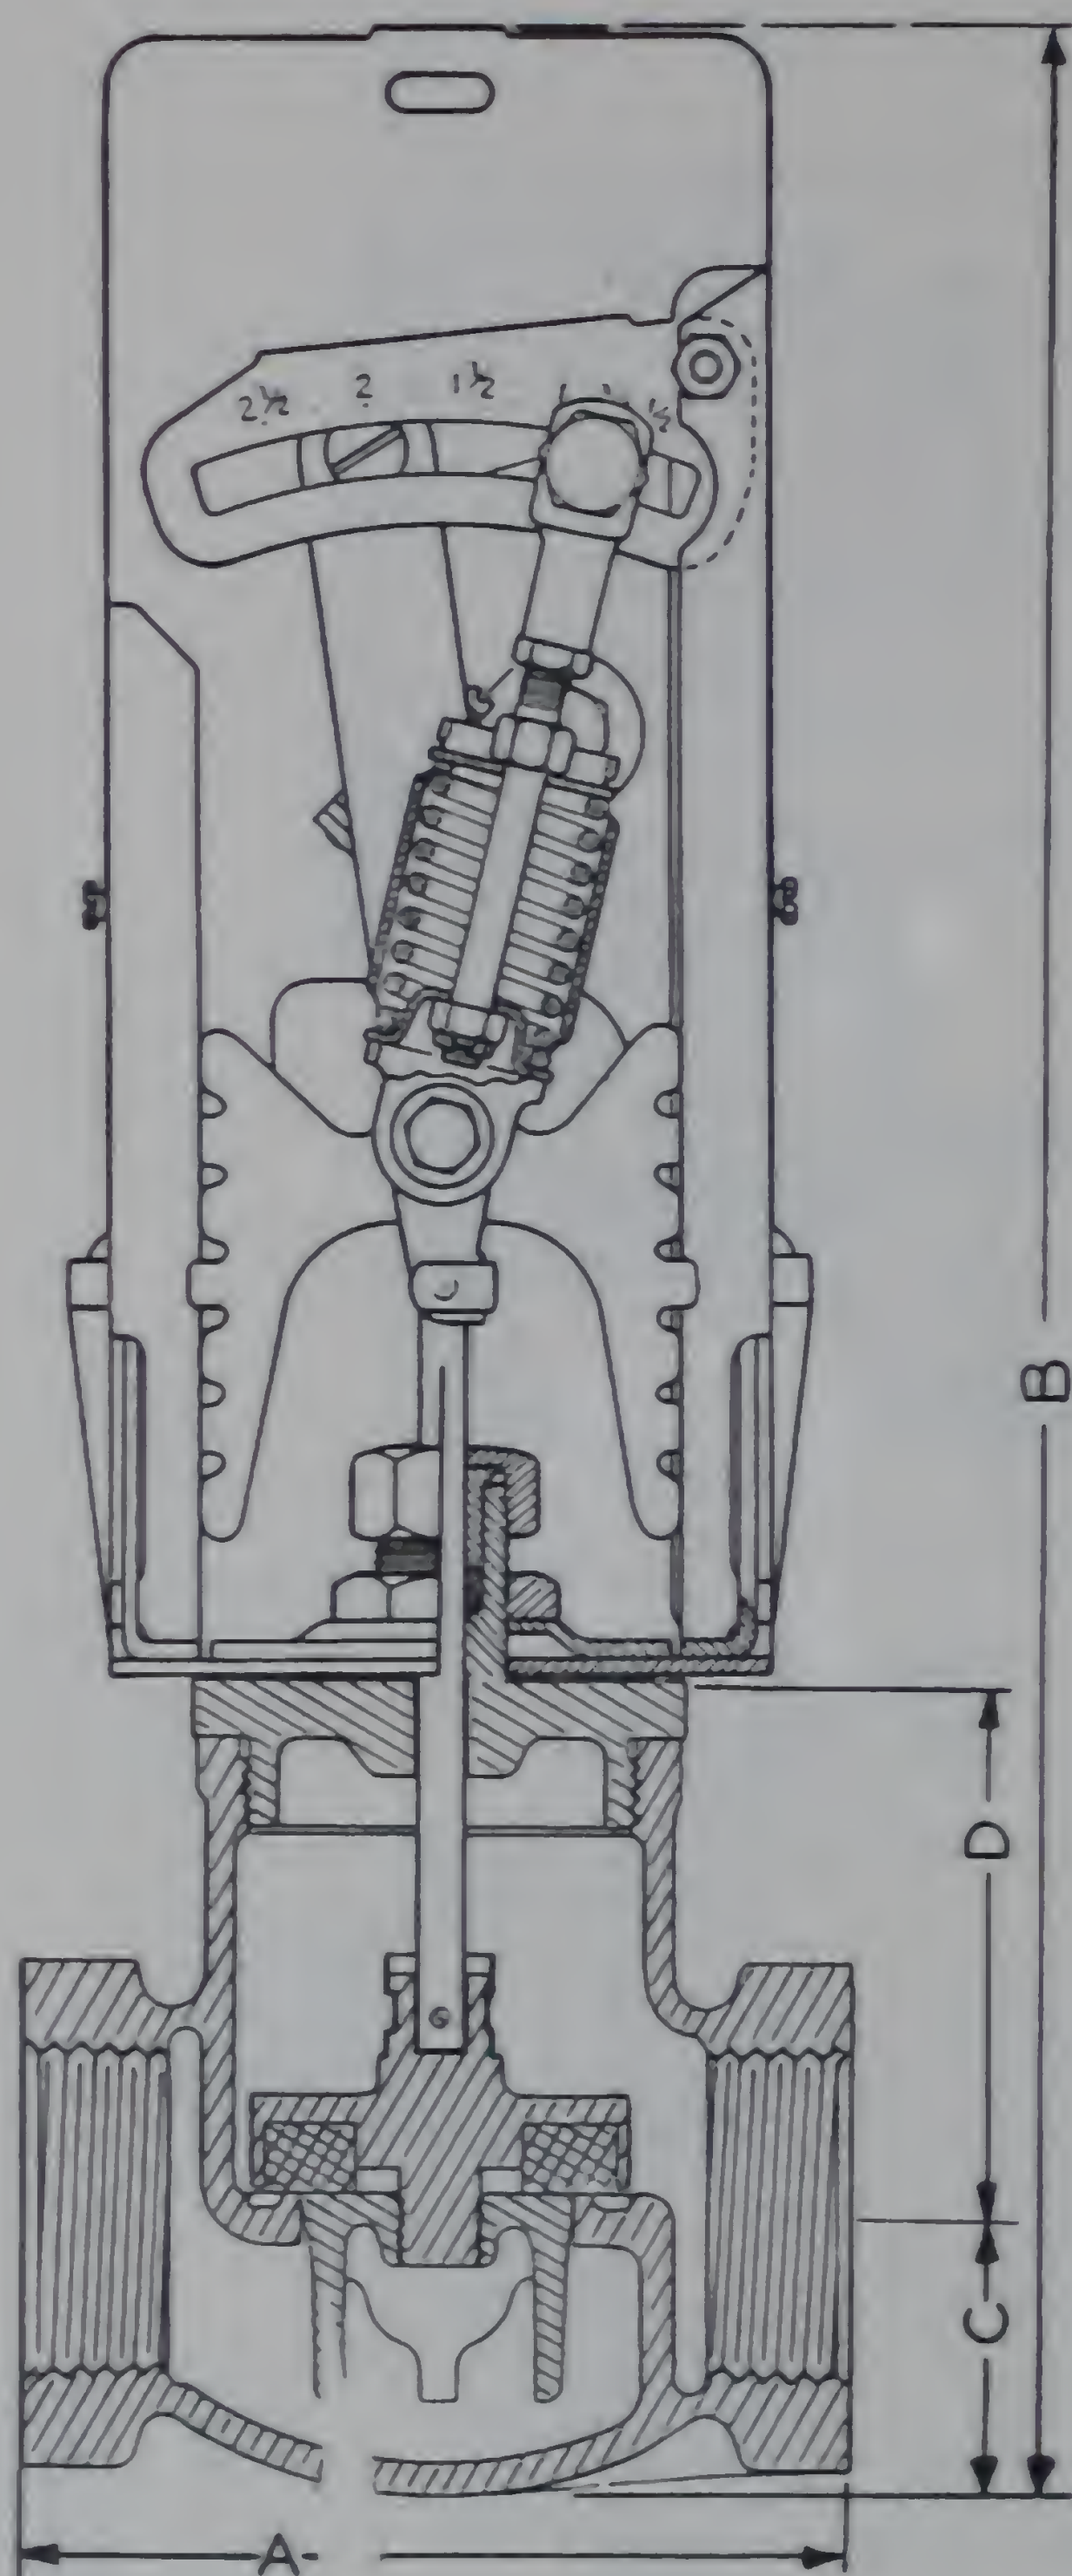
Dimensional drawing of screwed Type K200B Motorized Valve.
